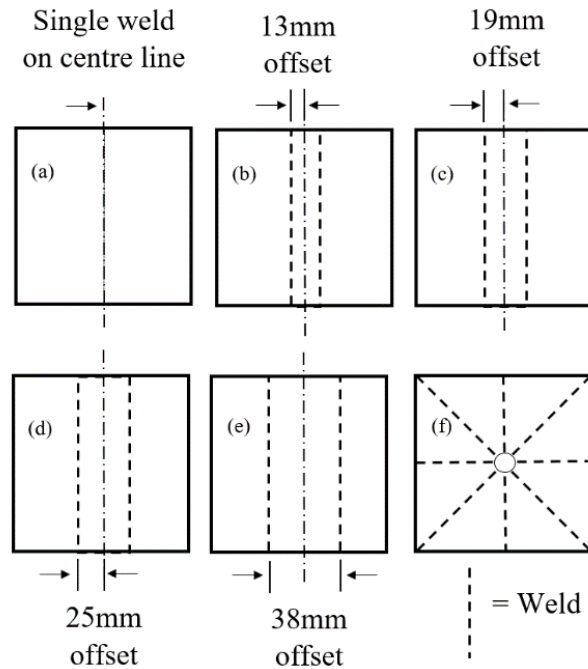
Weld layouts used for forming tests. Layouts a - e were used for global formability tests (LDH & bi-axial stretch) and layout f was used for local formability tests (HET)
